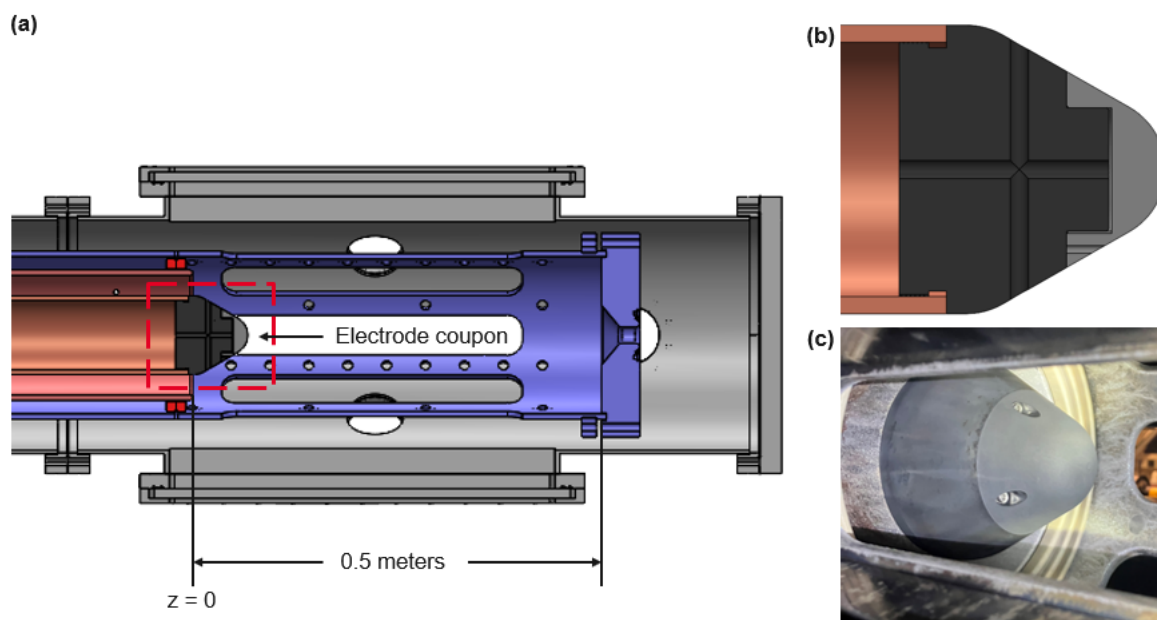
(a) Cross-sectional machine drawing of the assembly region showing the inner electrode positioned 8 cm downstream of $z = 0$, providing optical access for spectroscopy measurements through the fused silica windows. The redesigned electrode assembly incorporating the removable coupon is outlined in red. Removal of the windows enables access for coupon replacement through the slots in the outer electrode. (b) Enlarged section-view of the electrode coupon assembly. Fasteners are not visible in the plane of the cross-section. (c) Image of a pristine graphite electrode coupon installed on ZaP-HD with visible fasteners.
